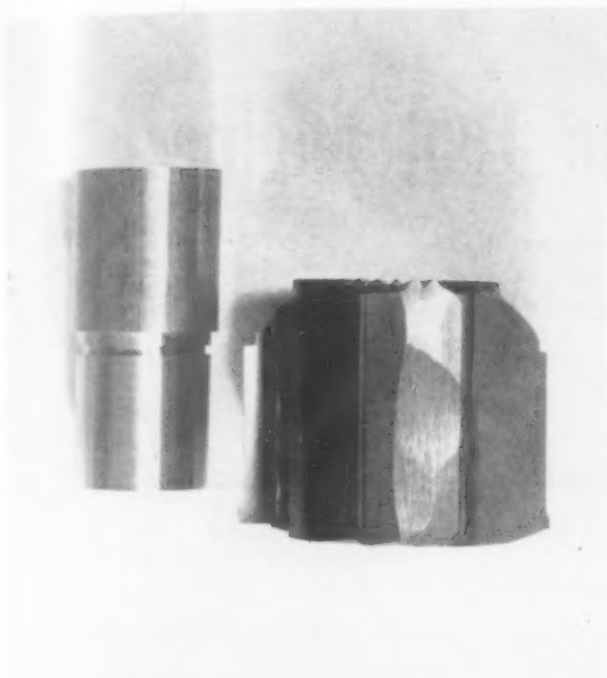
This bellows head bearing, machined from Ampcaloy tubing, requires a circular form tool to rough minor diam to 1.075 in. About 0.0145 in. stock is left for finishing.
